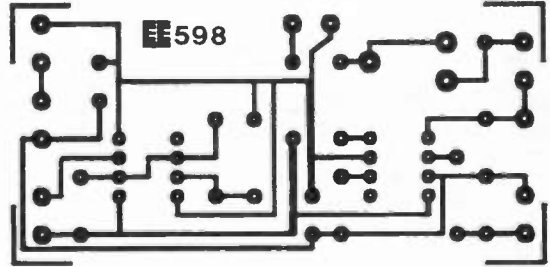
Component layout wiring details and full size printed circuit board copper foil master pattern.
